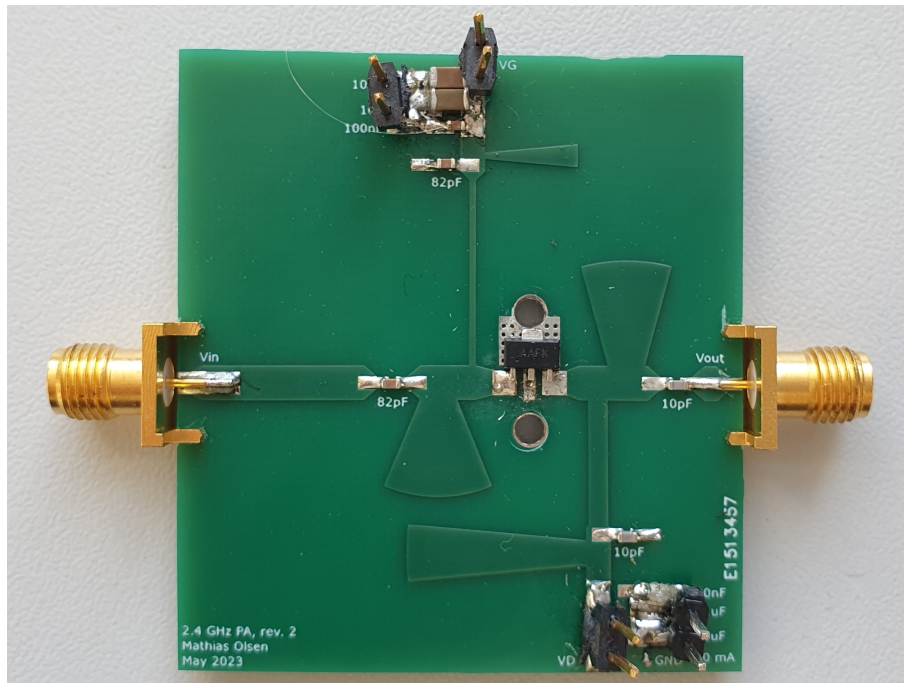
The final rev. 2, 50 mA PCB.
